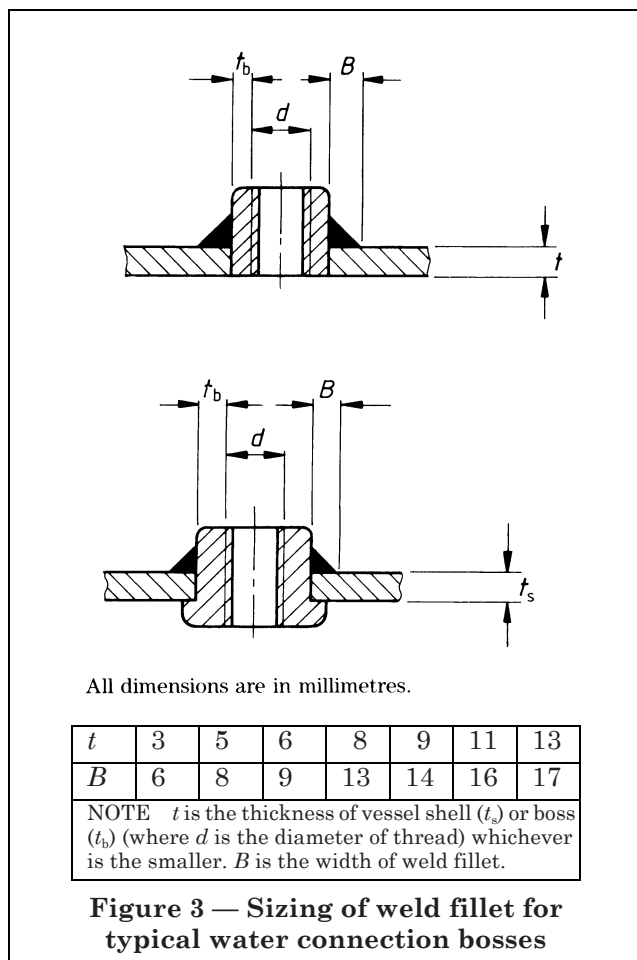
Sizing of weld fillet for typical water connection bosses
